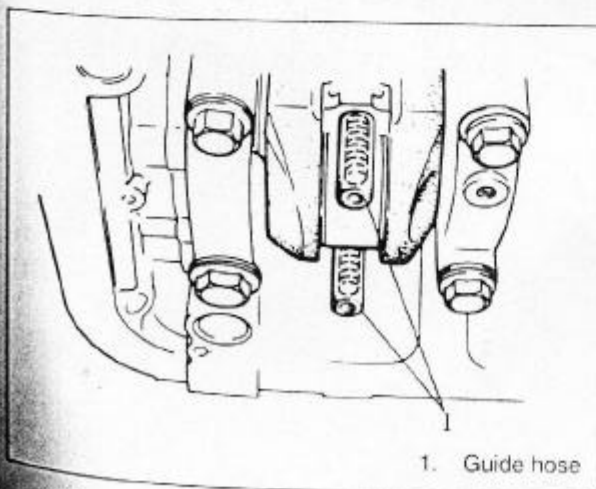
A — 76 INSERTION OF GUIDE HOSE
